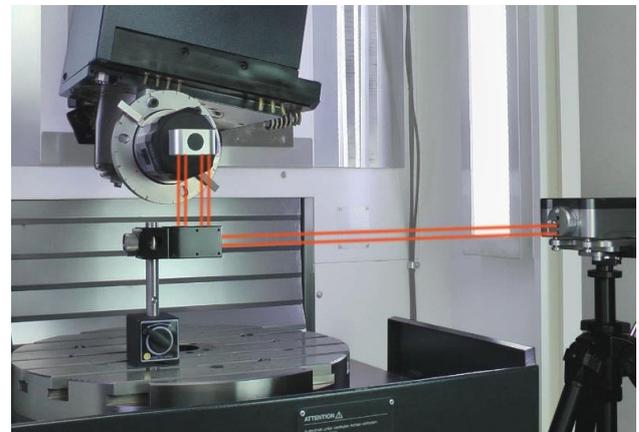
Measuring rotary axis with Renishaw Ballbar XL-80
